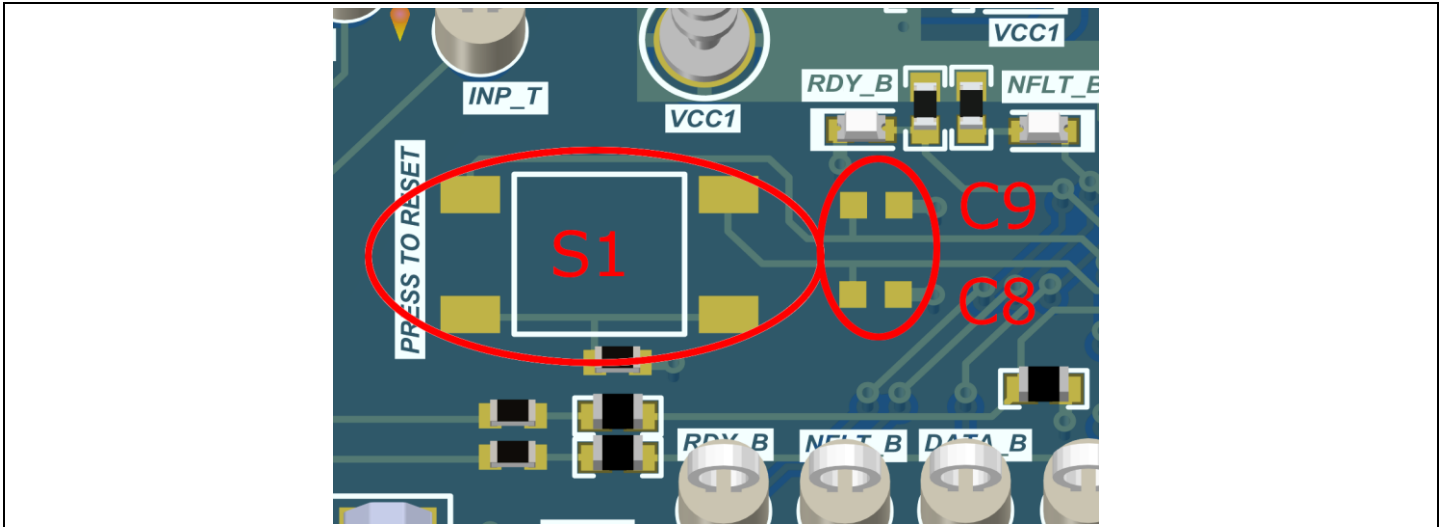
Components to be removed for remote reset on REV 1.0 PCBs
